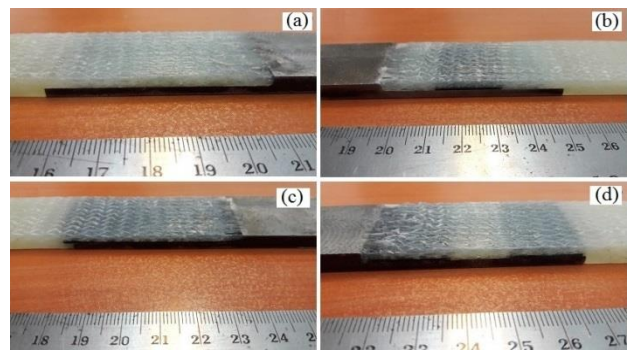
Simple single lap specimens, a) specimen 1, b) specimen 2, c) specimen 3, d) specimen 4
